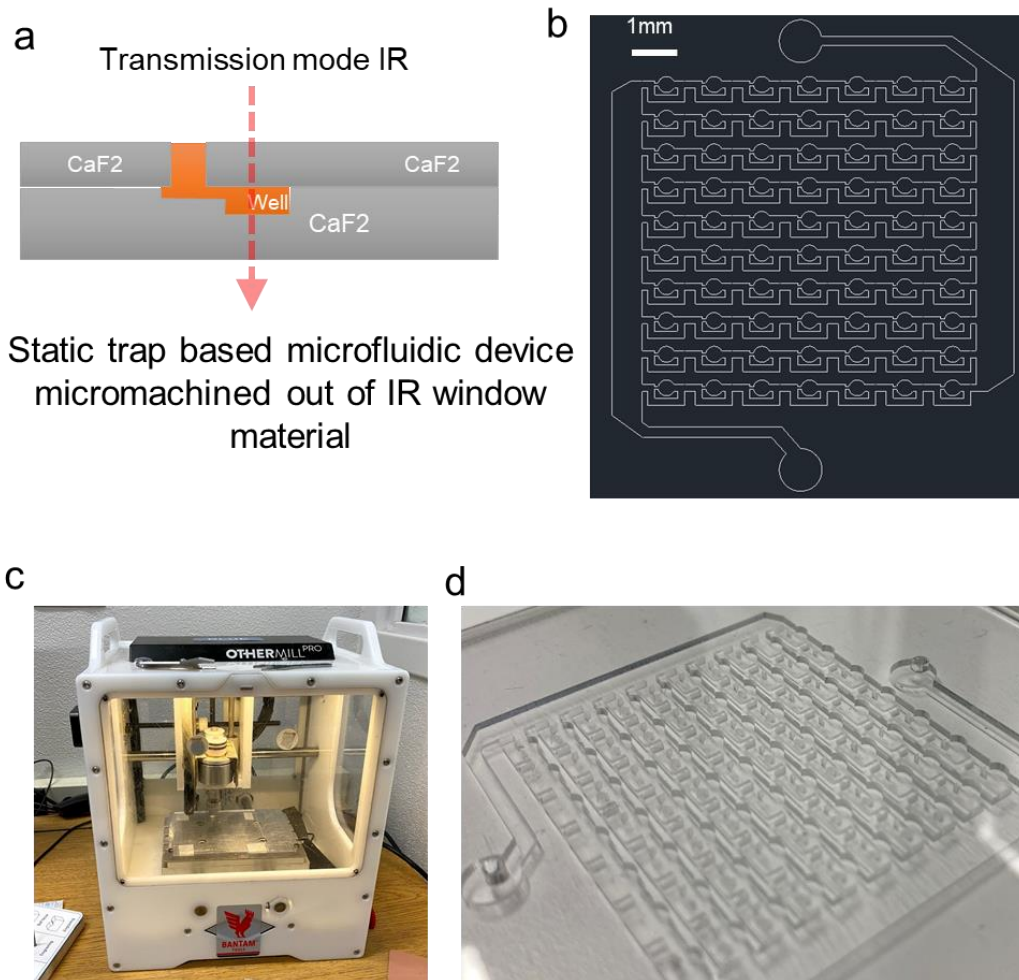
(a) Cross-section of the proposed microfluidic device. (b) Design of the microfluidic device. (c) Desktop milling machine used for making a mockup device. (d) The mockup device machined in PMMA.
